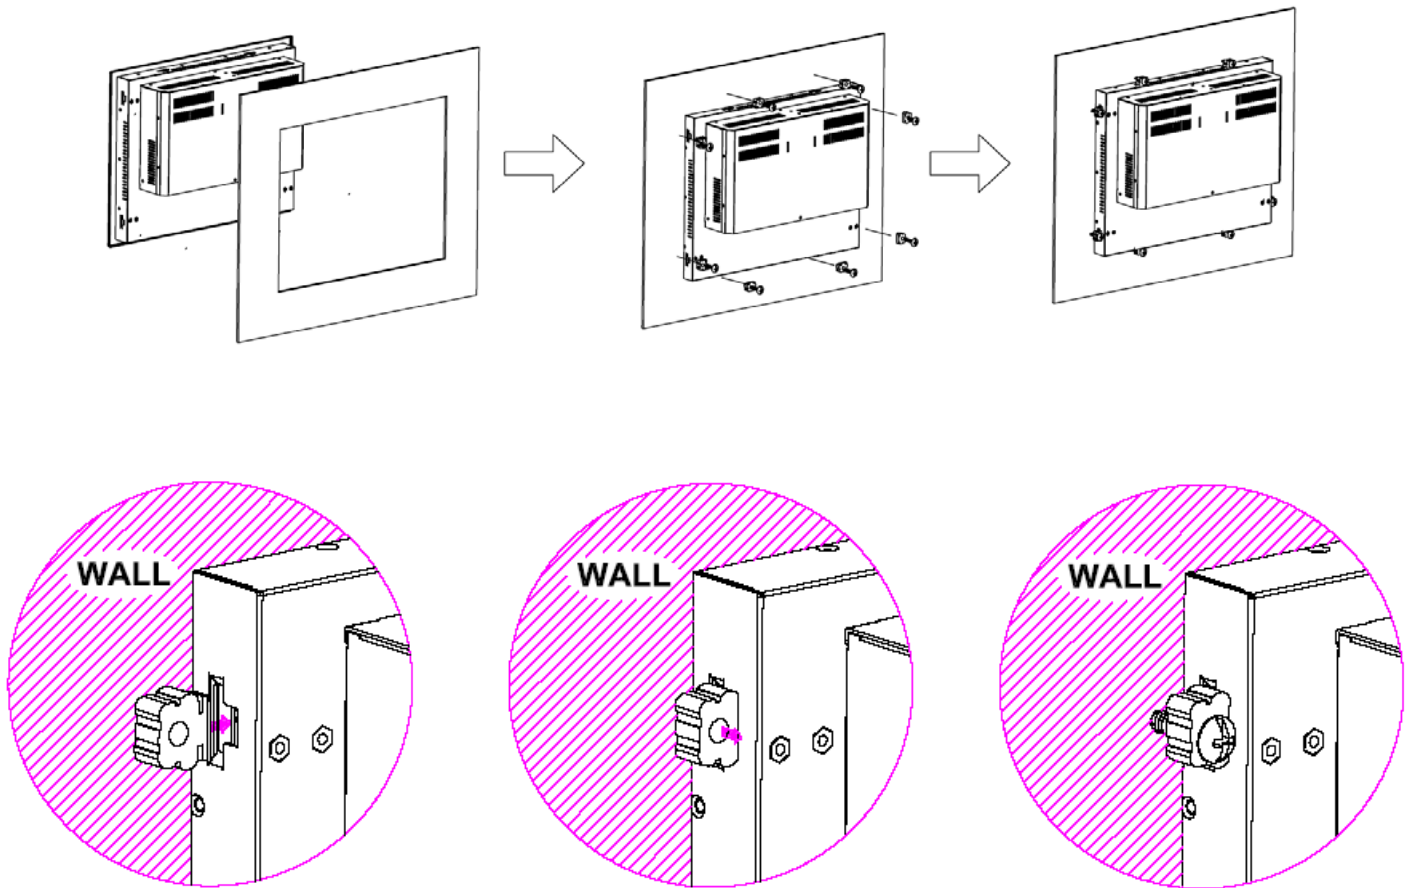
Panel mounting of the APC-3215B/3515B/3715B/3915B
